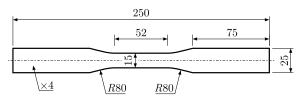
Engineering drawing of coated MAR-M247 specimen for mechanical testing.
